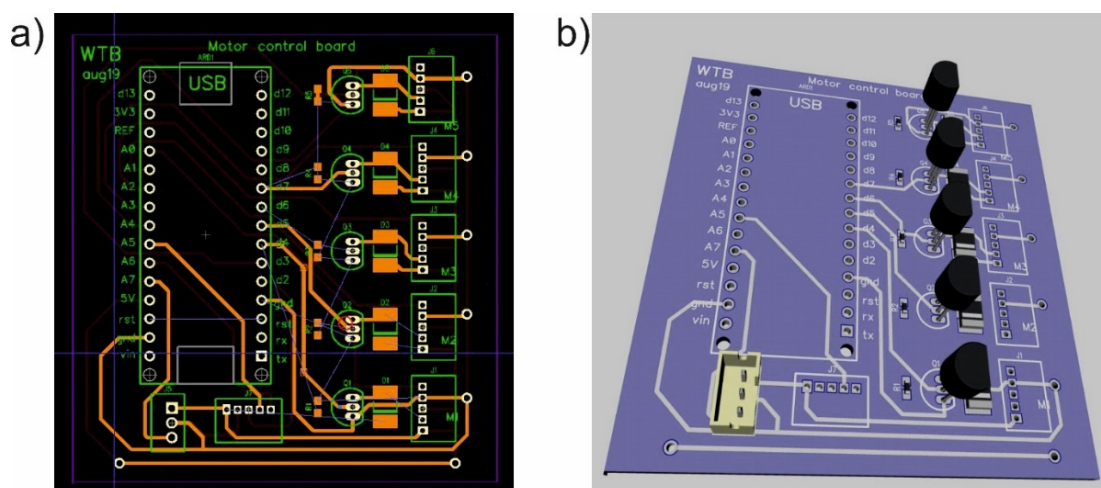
PCB for multiple pump platform. (a) PCB routing schematic and (b) STEP file showing PCB with mounted electronics.
